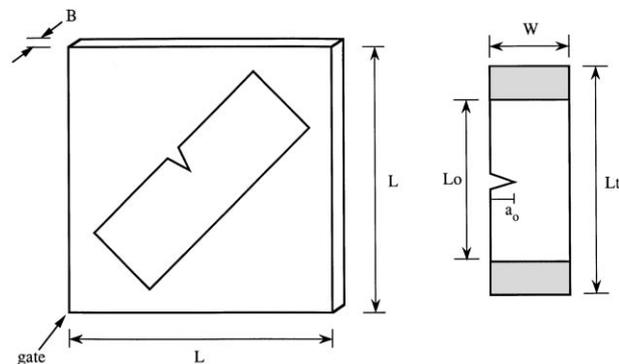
Position from which test pieces were cut from polypropylene/glass injection moulded plaques, and shape and size of SENT specimens. Dimensions are: $L = 127$ mm, $B = 2.7$ mm, $L_t = 120$ mm, $L_o = 62$ mm, $W = 27$ mm, $a_0 = 3$ mm.
